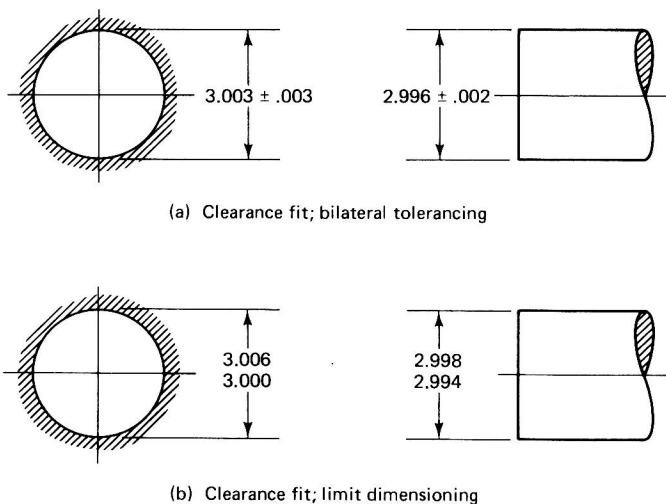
Methods for placing tolerances on drawing.
